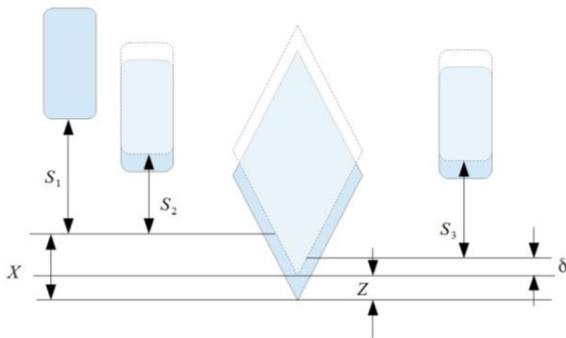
Principle measuring set-up including Sensors 1-3 and cutting insert
